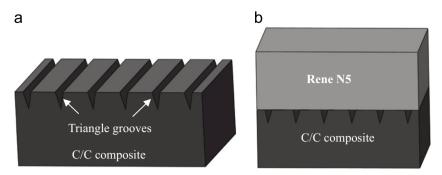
(a) Schematic showing the structure of zigzag triangle grooves on C/C. (b) Assembly sketch of the C/C and Rene N5 brazed joint.
